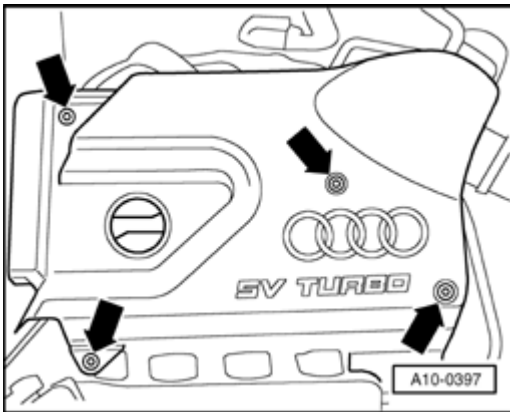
Removing Engine Cover Panel Above Cylinder Head
